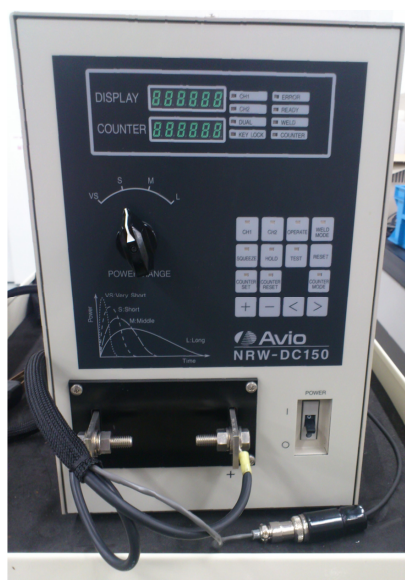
Spot welding machine (NRW-DC150, Avio inc., JP)
